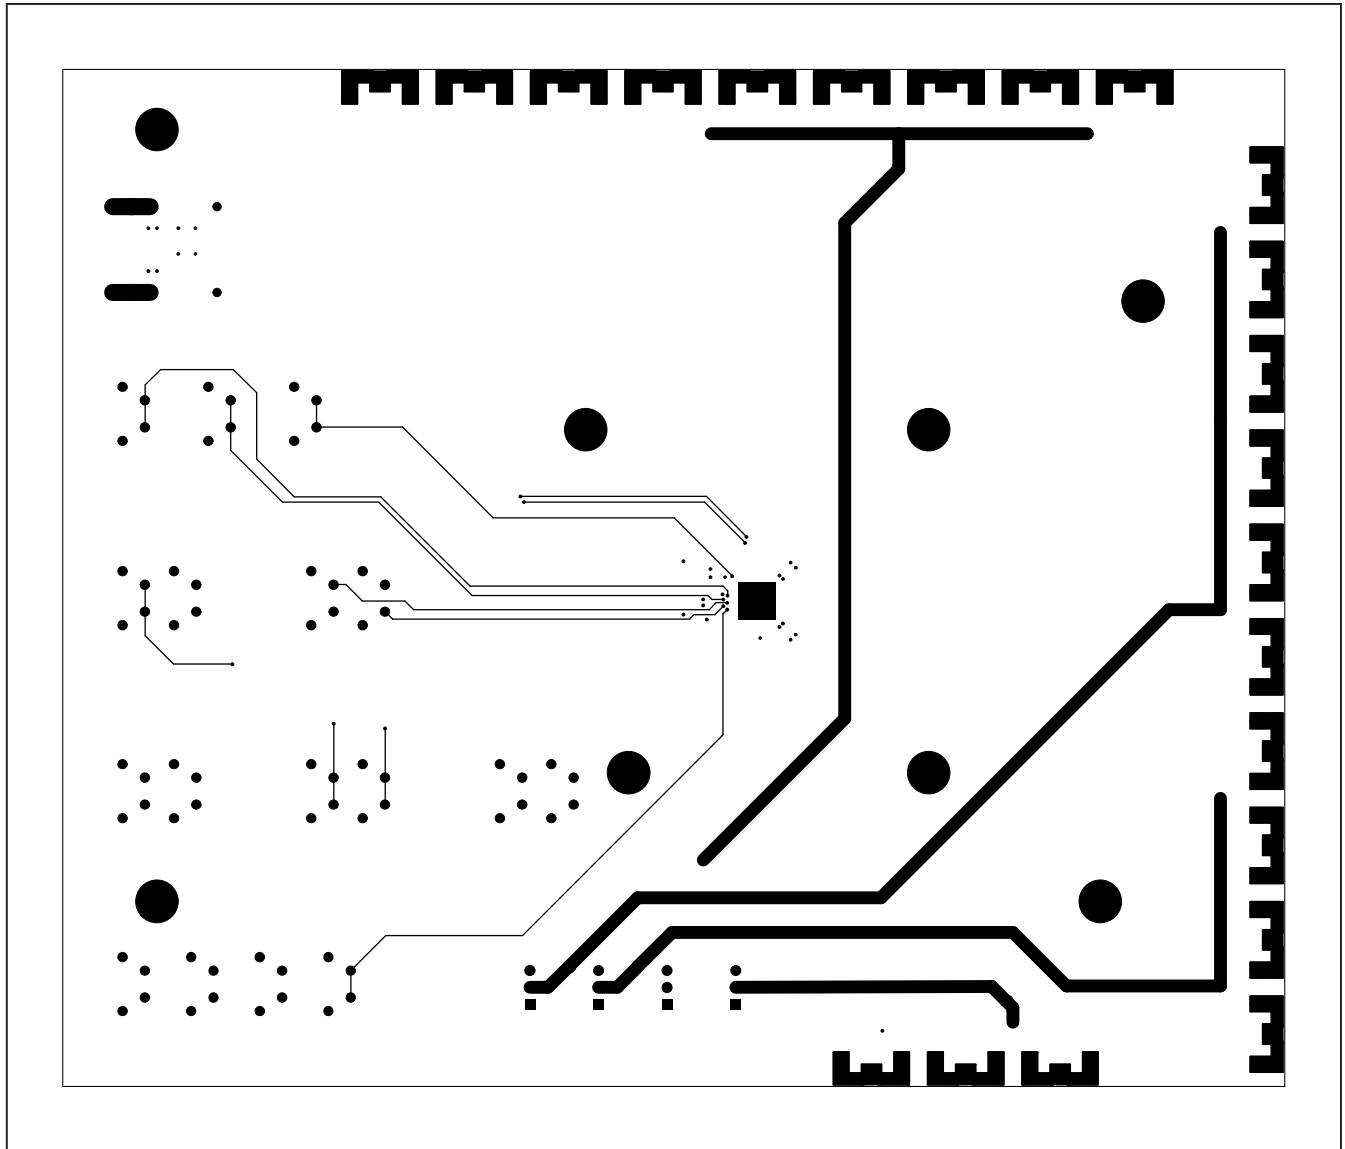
MAX3639 EV Kit PCB Layout—Solder Side
